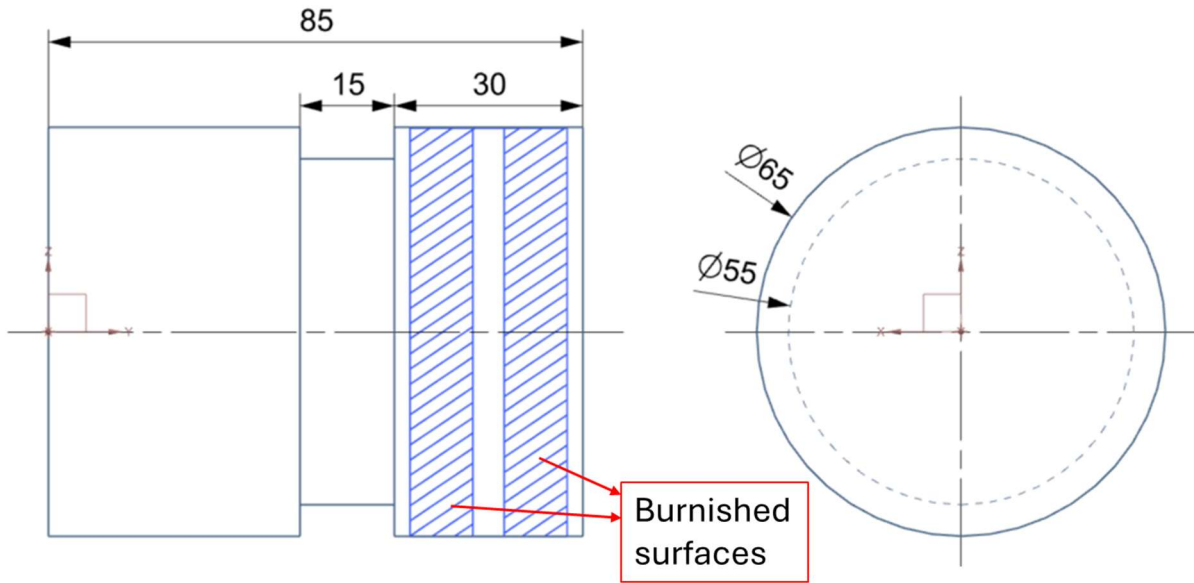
, CAD model of 42CrMo4 workpiece for cylindrical burnishing.
